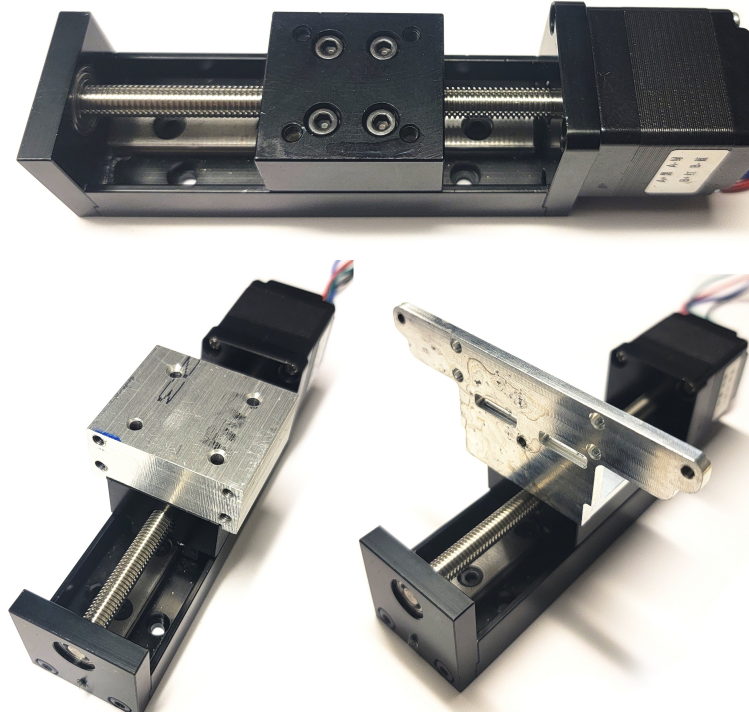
Detail of Z-axis linear actuator and mounting of Z-axis carriages Top: compact stepper motor linear actuator used in our designs is shown. It comprises a stepper motor driving a leadscrew, driving a carriage block mounted on a linear rail. The carriage block has four M3 threaded holes for mounting. Bottom left: The minimal Z-axis carriage for the single camera design, positioned precisely for mounting to the linear rail. Bottom right: The same mounting scheme, for the Z-axis carriage designed for the 24 camera design.
